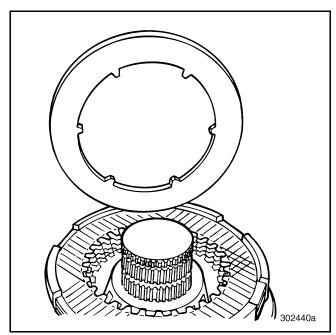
Removing Spacer from Disc Pack (T313L21/T318L21 Shown)
